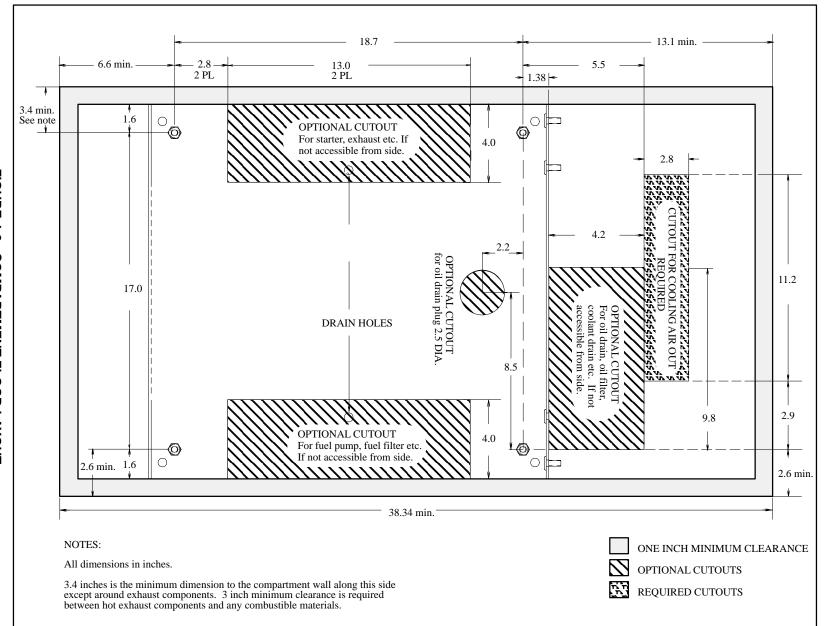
COMPARTMENT FLOOR LAYOUT
